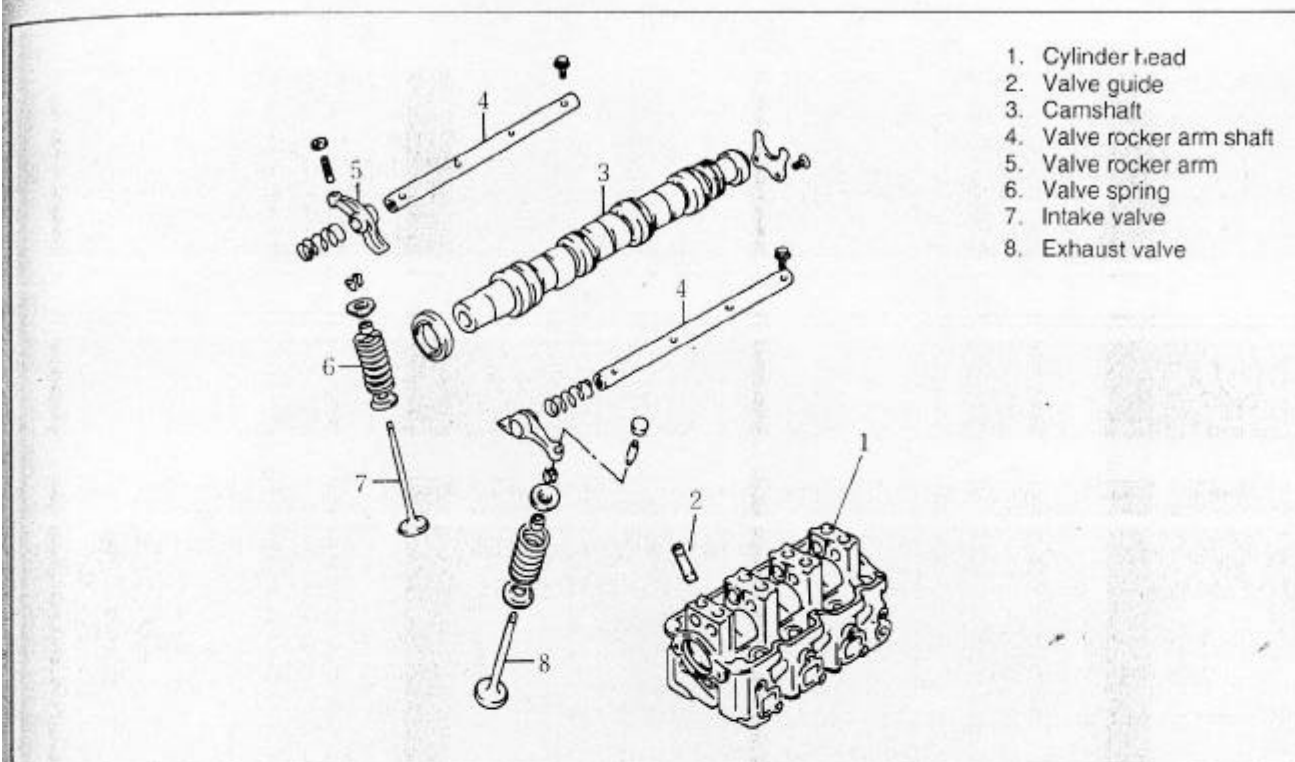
A — 39 CYLINDER HEAD, CAMSHAFT, ROCKER ARM SHAFT
